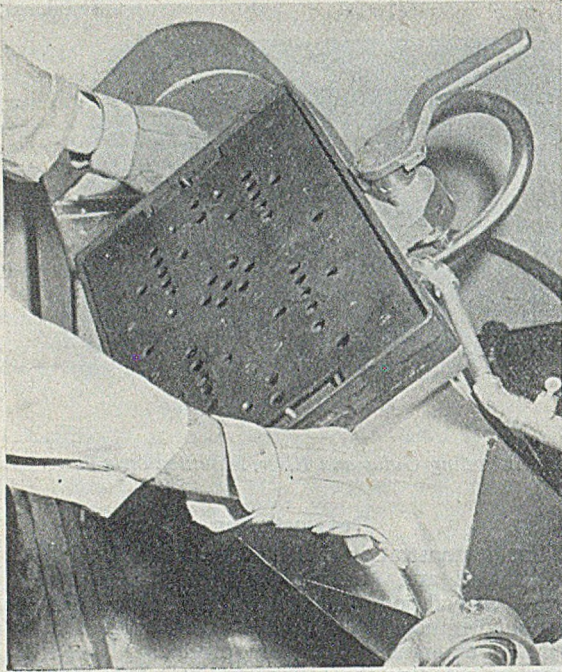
The Preheated Pattern is placed over the Open Hopper of the Machine and Clamped. Next the Whole is Inverted, allowing the Mixture to fall on the Hot Pattern.
